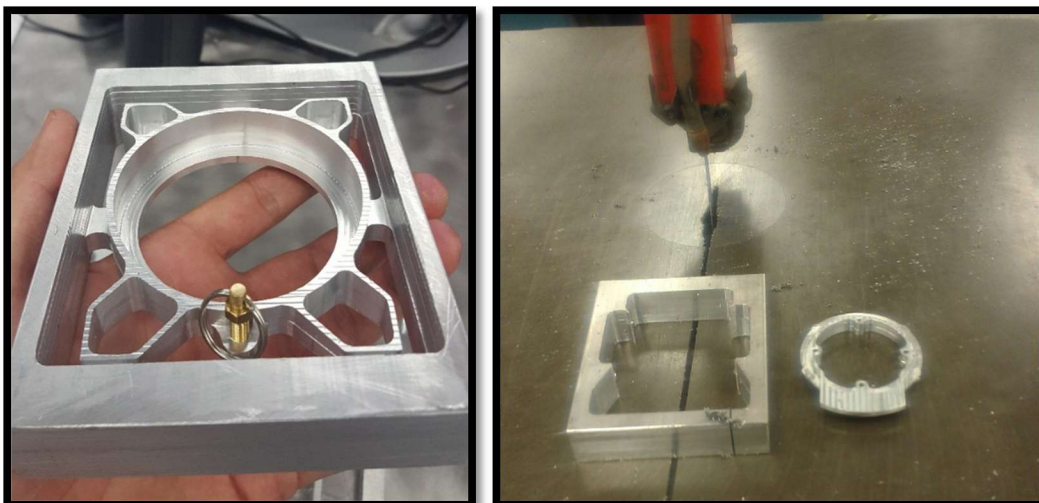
POST-CNC ROTATING WING JOINT SECTIONS
